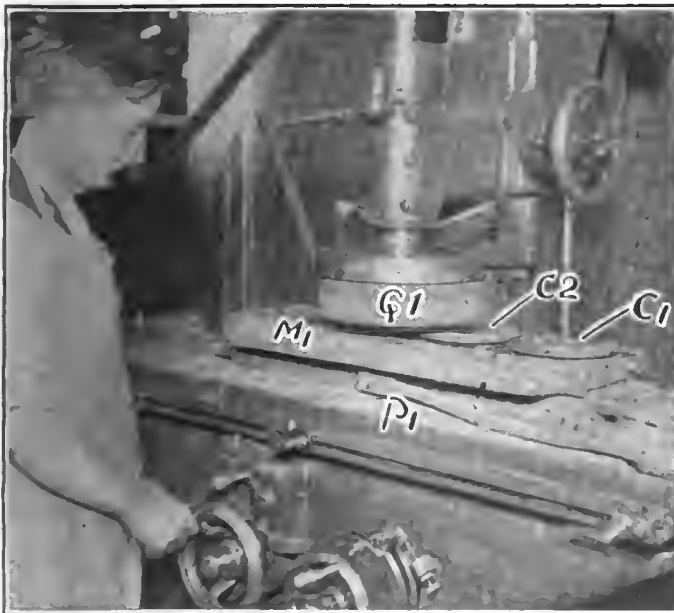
Flat grinder with magnetic chuck working on hand-hole plates in the Excelsior plant
